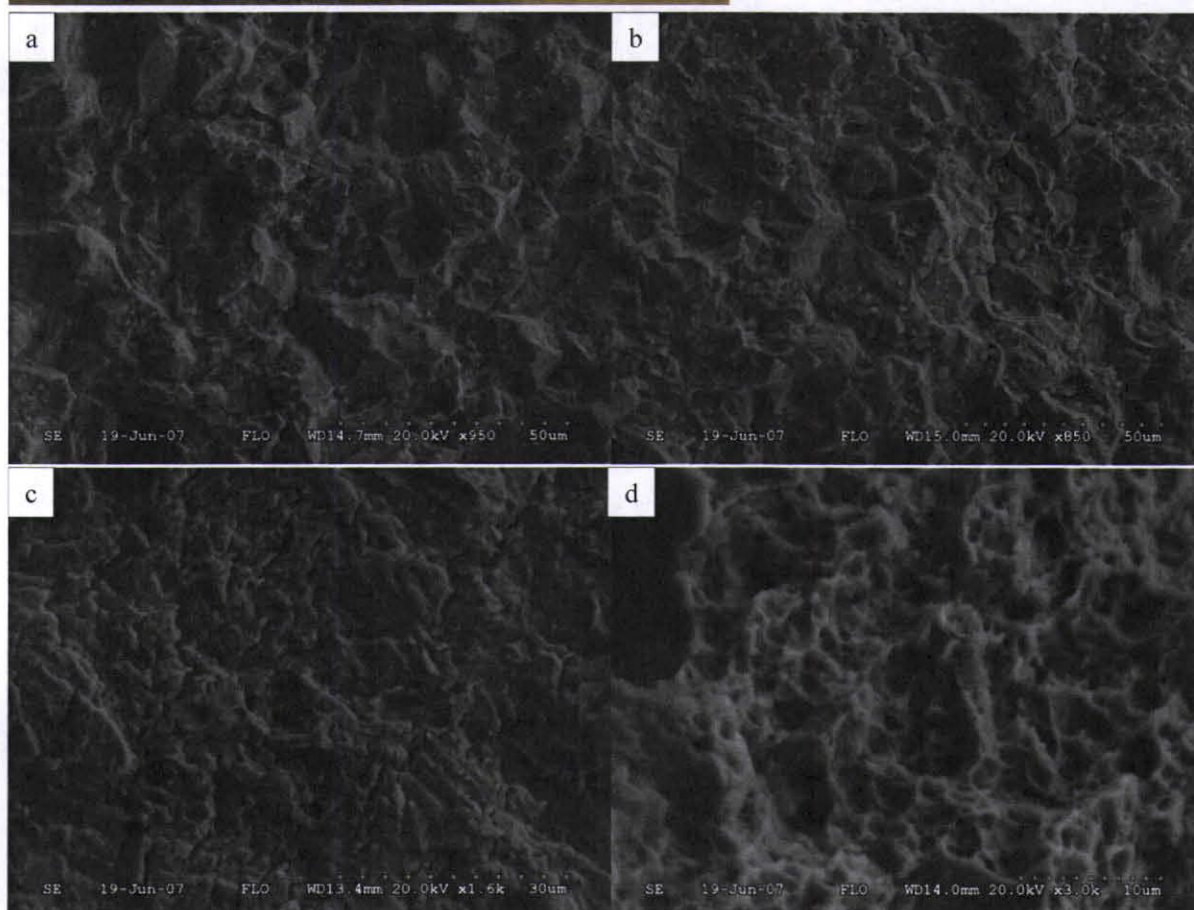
Representative pictures from fracture surface Bolt 6.
